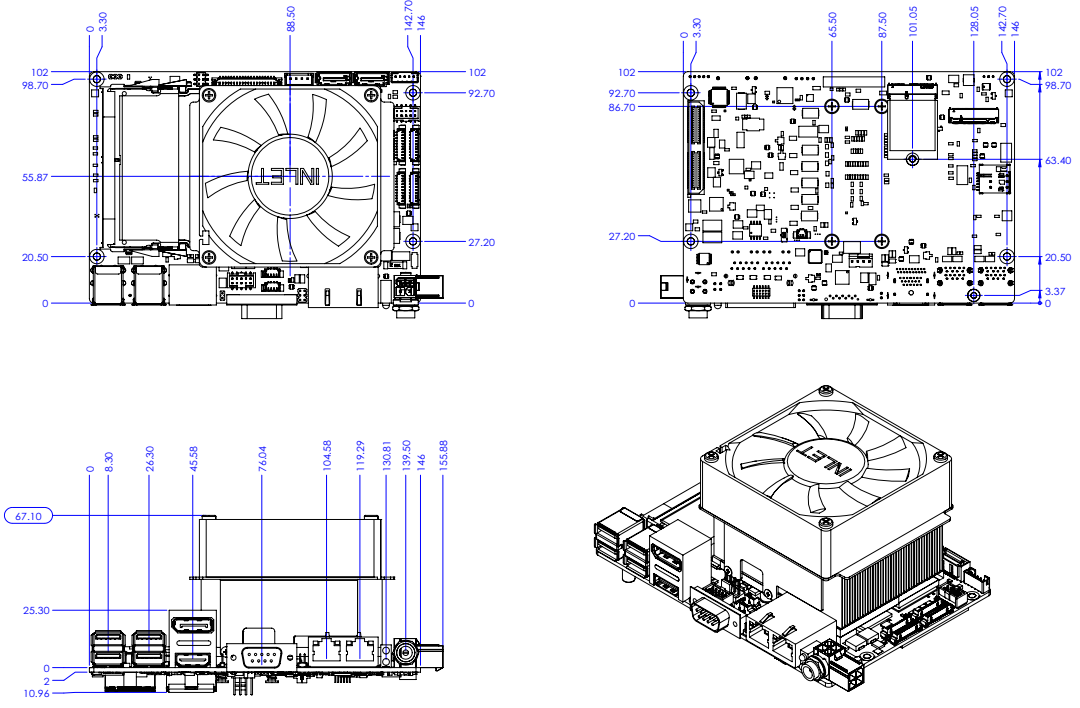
MIO-5393 Mechanical Drawing (with Cooler)
